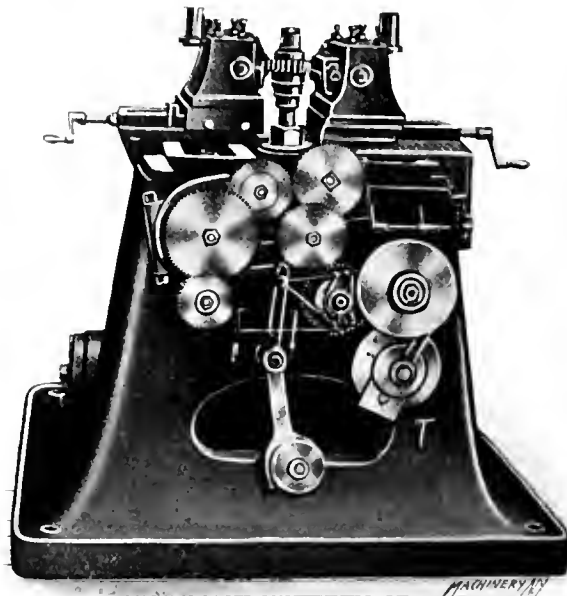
An English Spur Gear Generating Machine employing Multiple Tools of Rack-shaped Outline.
